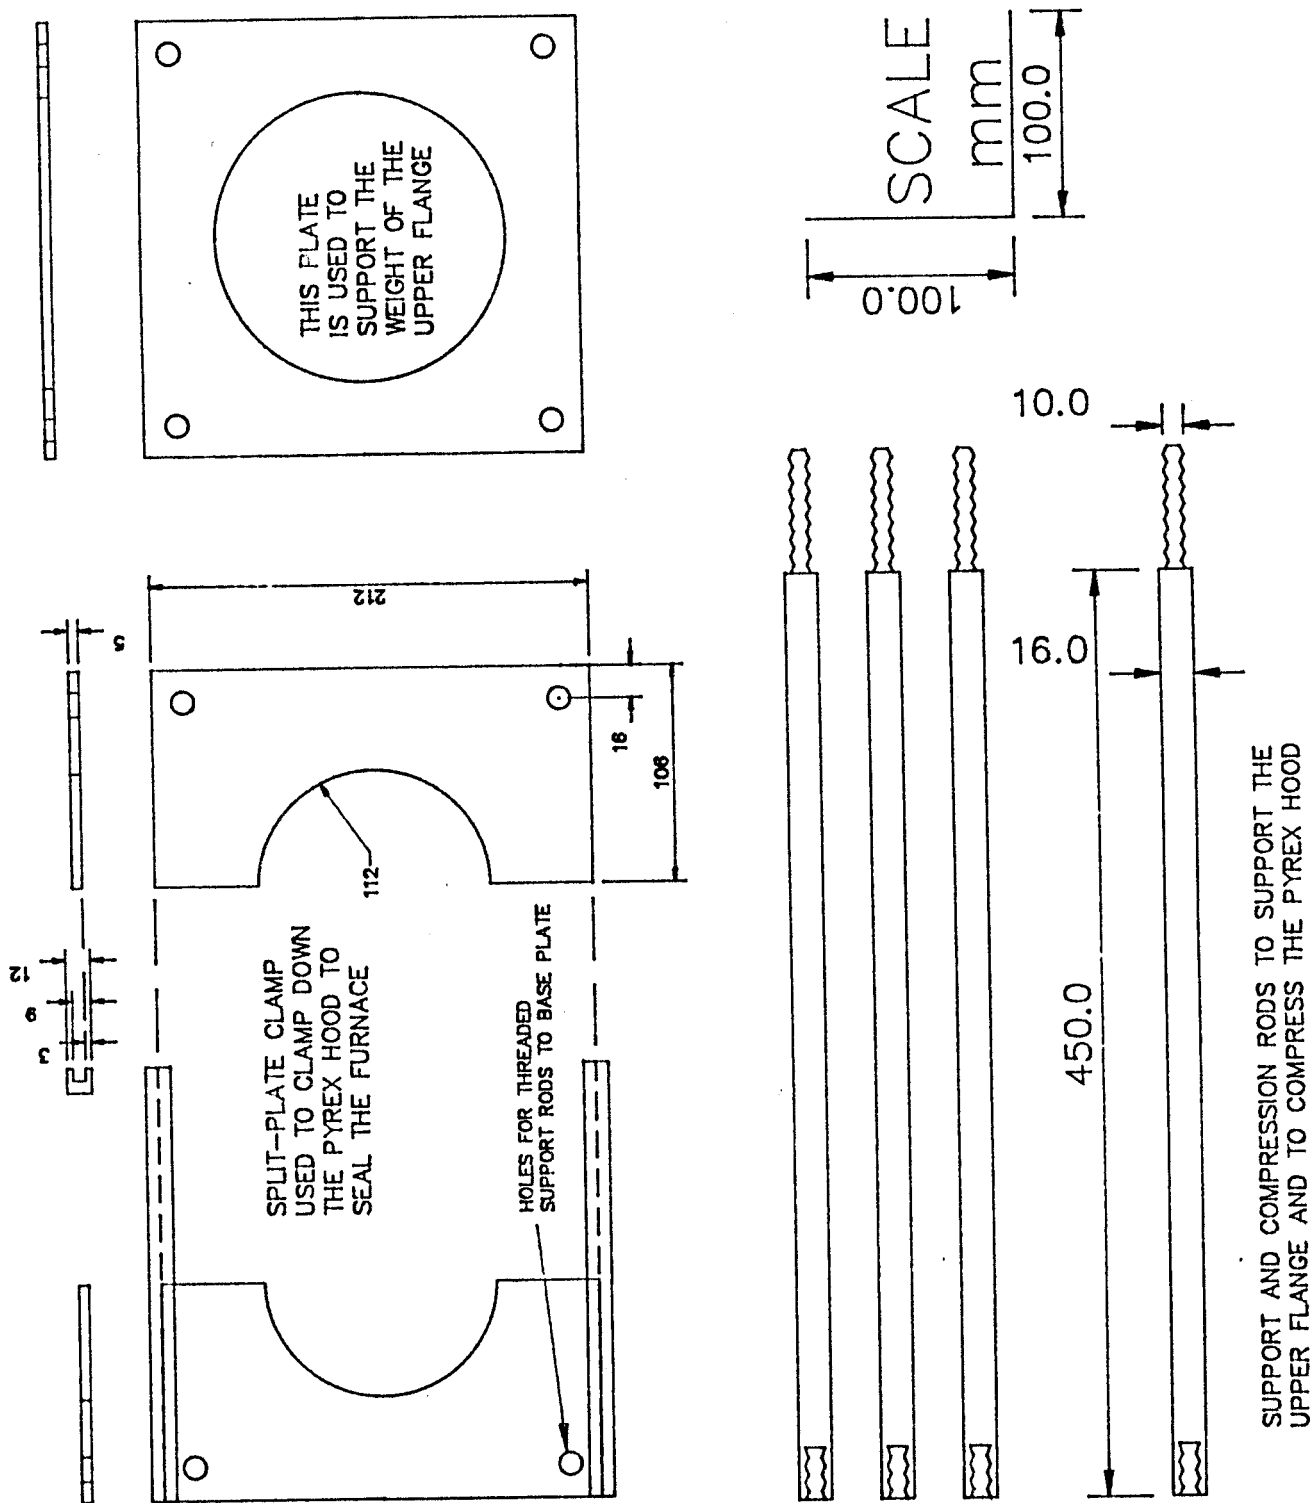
Hood clamping (split) plate, the upper flange supporting platform and the support rods.
